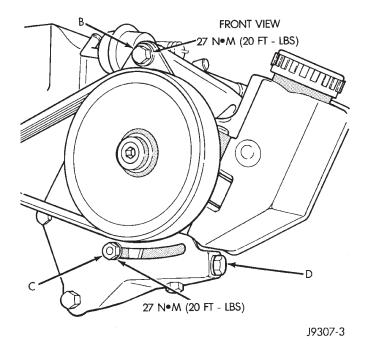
P.S. Pump Front Mounting Bolt/Locknut— Typical
